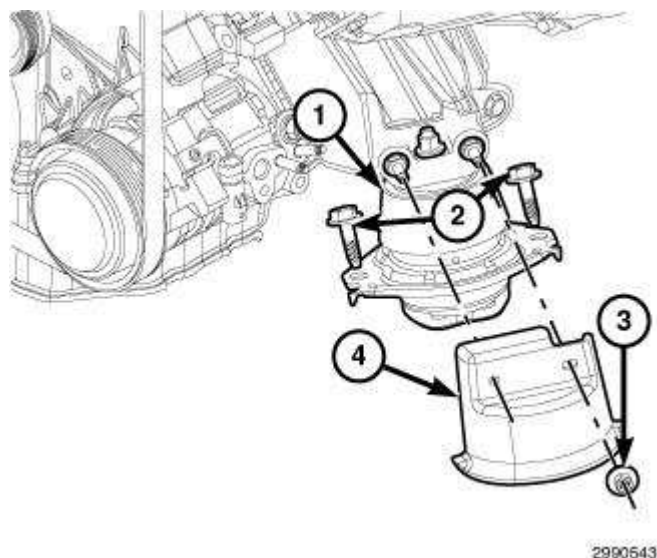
Engine Mount Heat Shield Retaining Nuts, Lower Mount Retaining Bolts & Heat Shields
